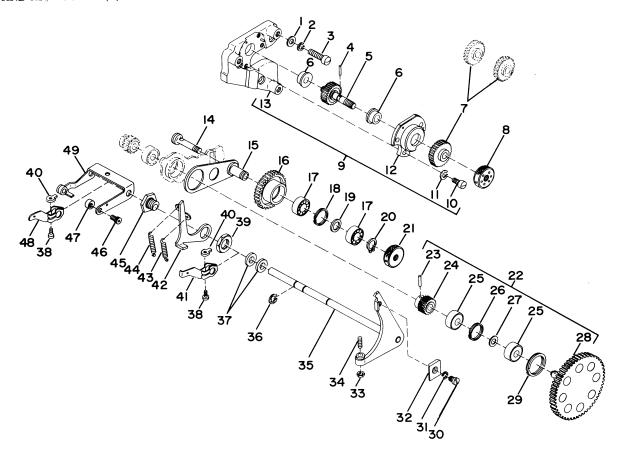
Gear Train, Automatic Carriage Return, and Line Feed Assembly SL-4-03315B Figure 19
